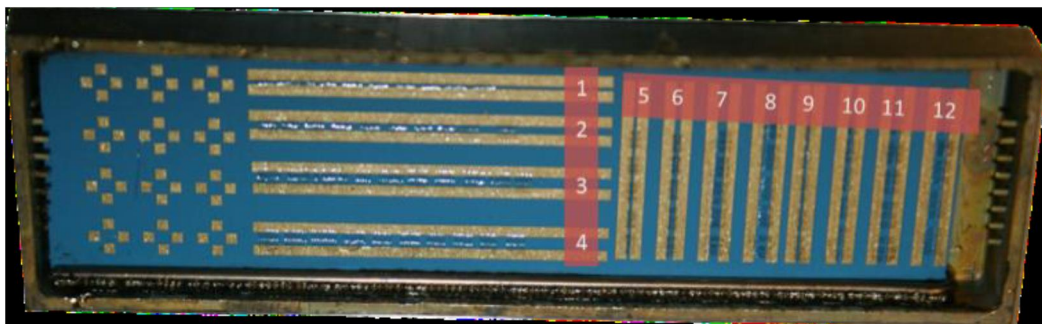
Bond Wire Test Board Mounted in Metallic Package
